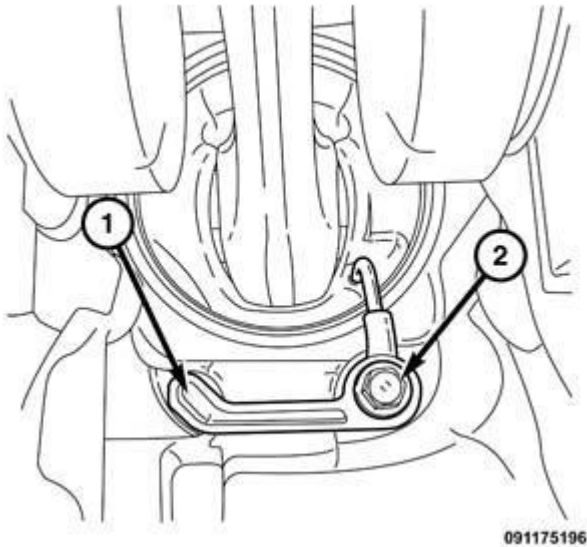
Removing/Installing Oil Jet Piston Cooling Nozzles
